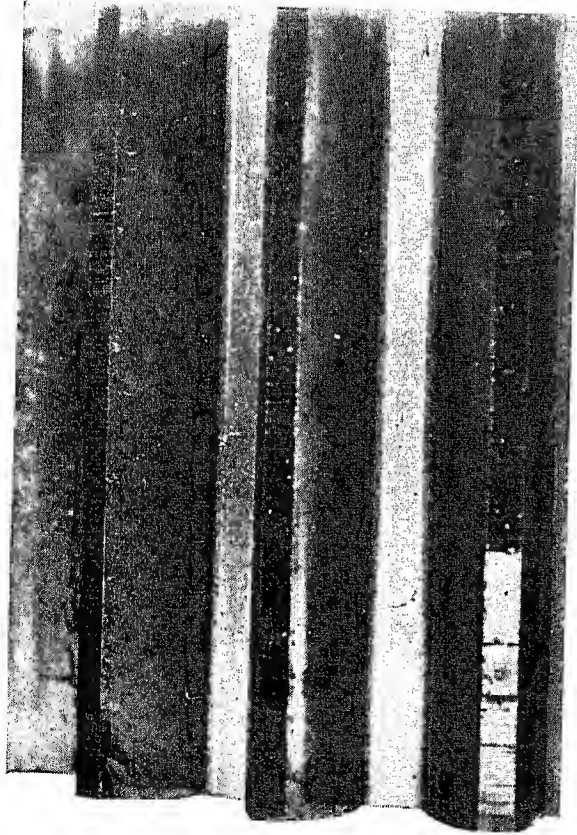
Fig. E.—Case-hardened pinion, showing longitudinal type of grinding cracks revealed by magnetic test.
